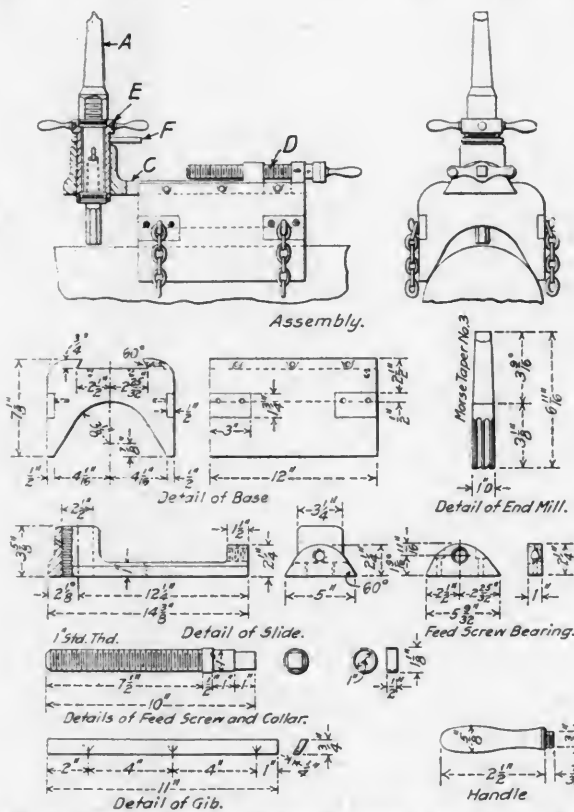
Air Driven Milling Cutter for Cutting Eccentric Keyways
